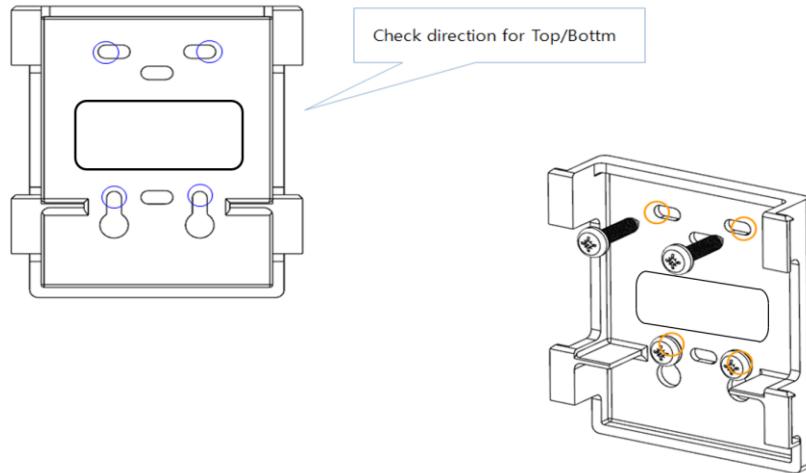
Attaching Bracket to the Wall (Wooden Wall & Ceiling Mount)
